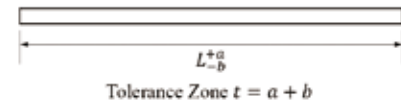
Tolerance zone of dimensional tolerances
